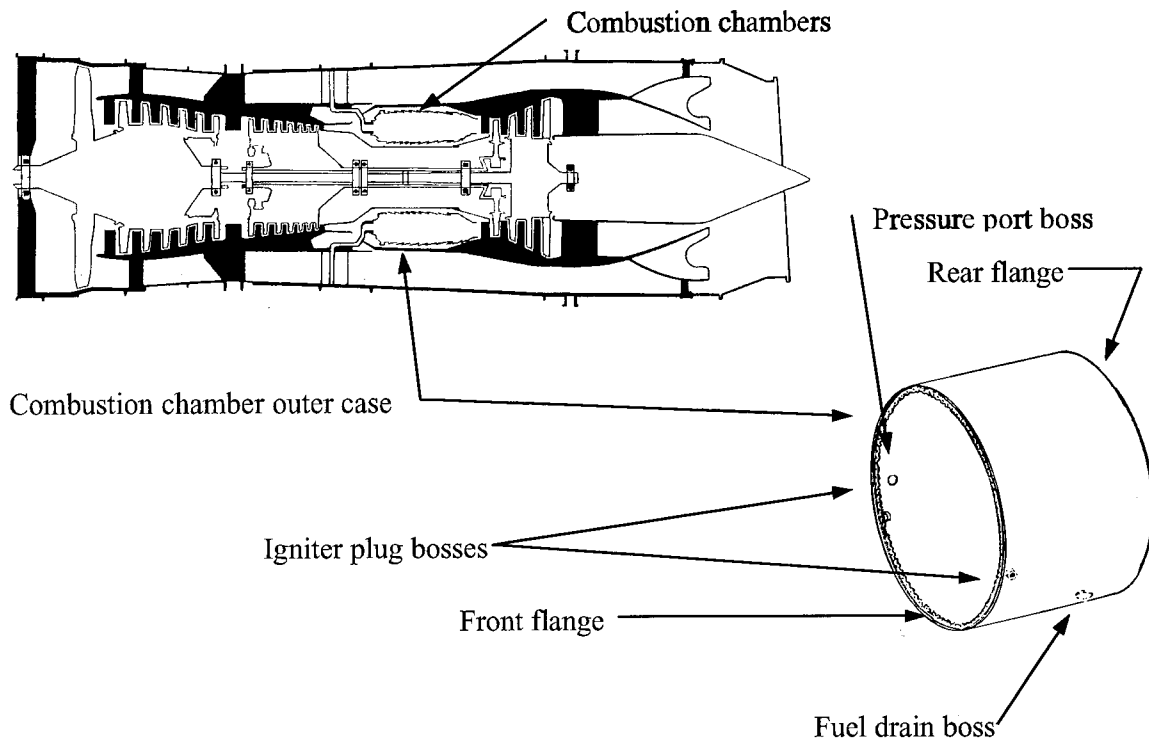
JT8D-200 engine cross section showing the location of the CCOC, and an enlarged view of the CCOC showing the location of the bosses and the case's front and rear flanges.
